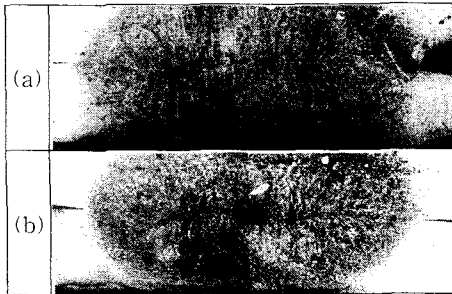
Nugget shape at 6KA clearance (a)0mm (b)5mm
